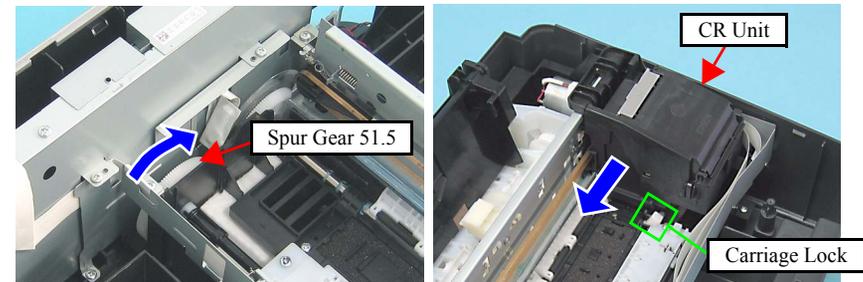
Unlocking the Carriage and Moving the CR Unit
